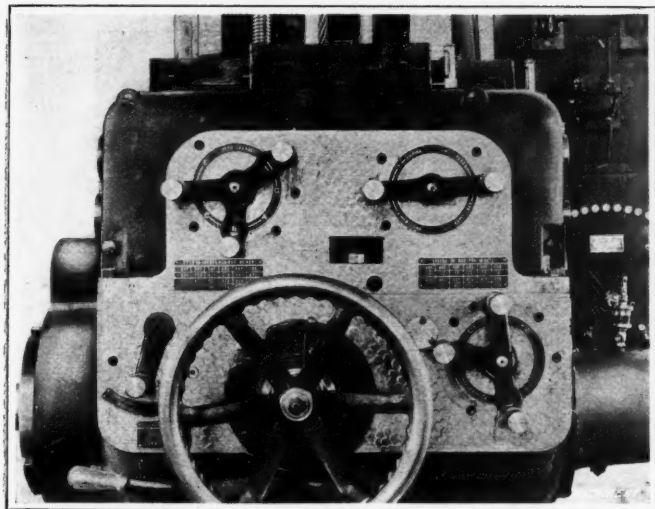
Saddle of the Landis Boring, Milling and Drilling Machine
